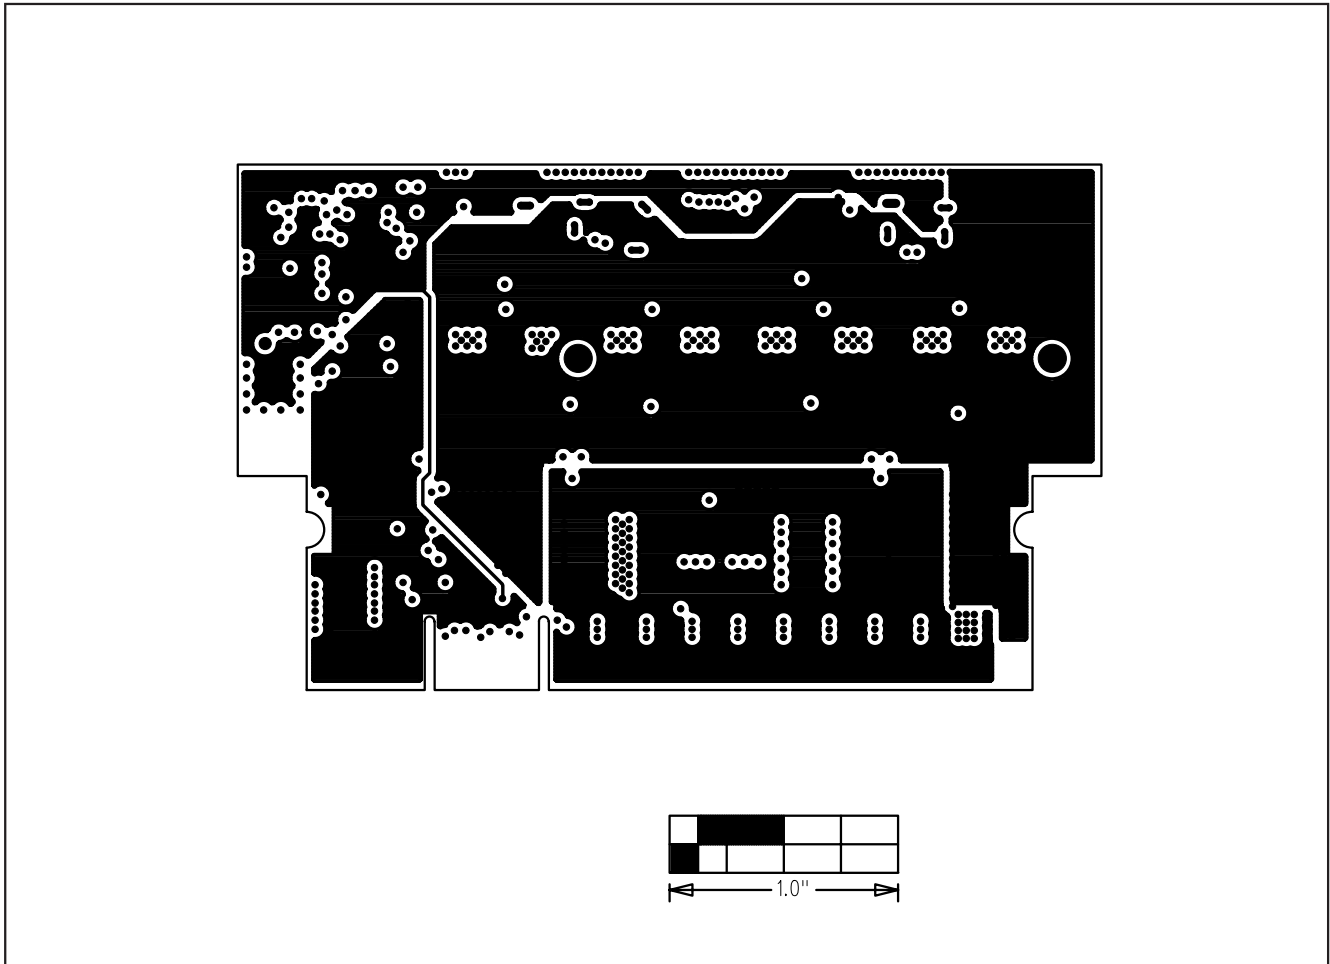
MAX8525 EV Kit PC Board Layout—GND Layer 3
